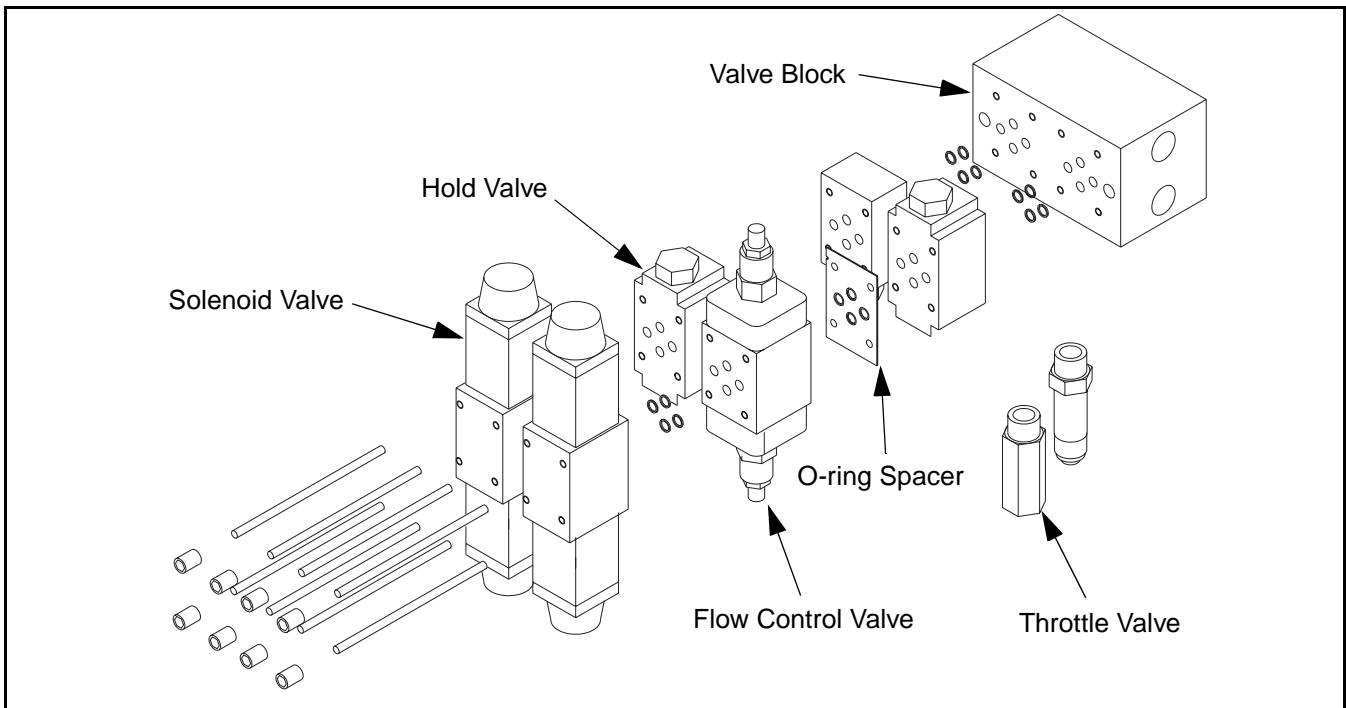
38 Hopper Wings/Right Tow Point Valve Bank
